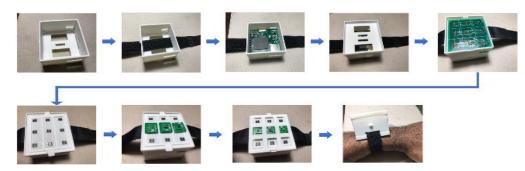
(Left to Right) a) Processing unit enclosure b) Strap through enclosure c) Processing unit PCB placed d) MSSI support enclosure e) MSSI PCB placed f) Sensor removal tray placed g) Sensor unit placed h) Sensor unit covered i) Mounted on body part.
